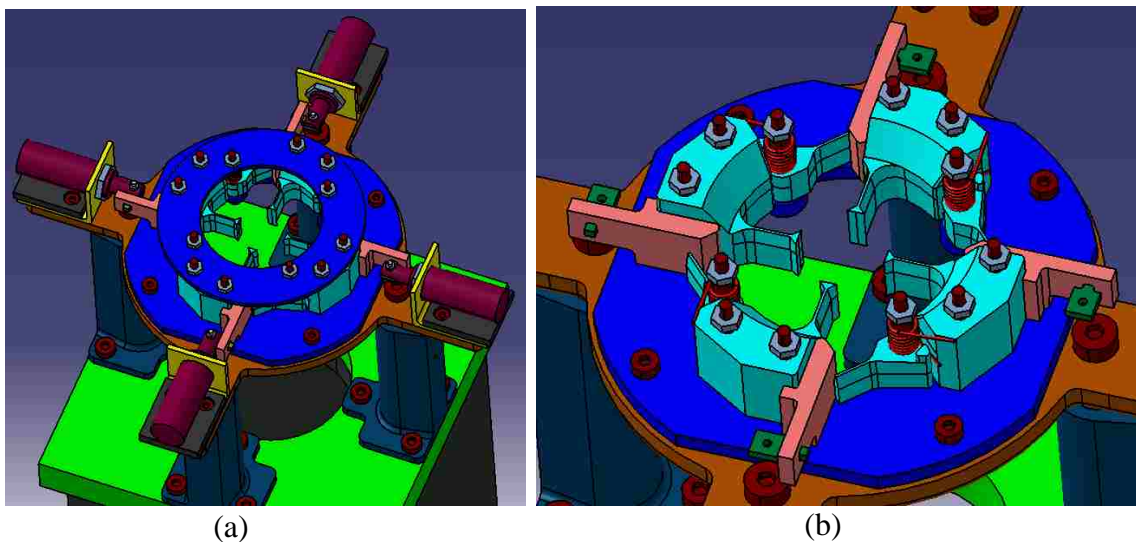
(a) CAD model of the rotary switchblade cutter design using 4 linear pull-type solenoids. (b) Front cover and solenoids removed for clarity.
